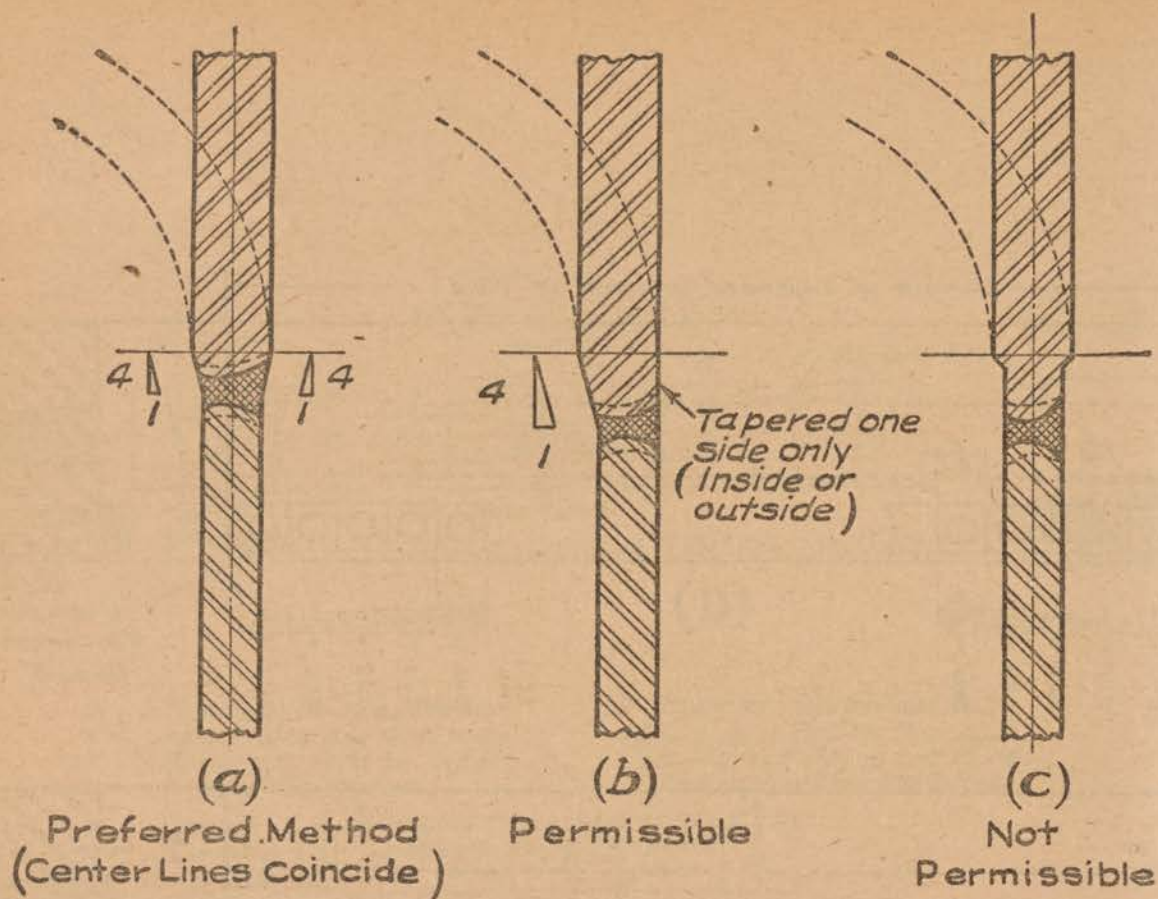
Butt welding of plates of unequal thickness. Removal of reinforcement optional.
